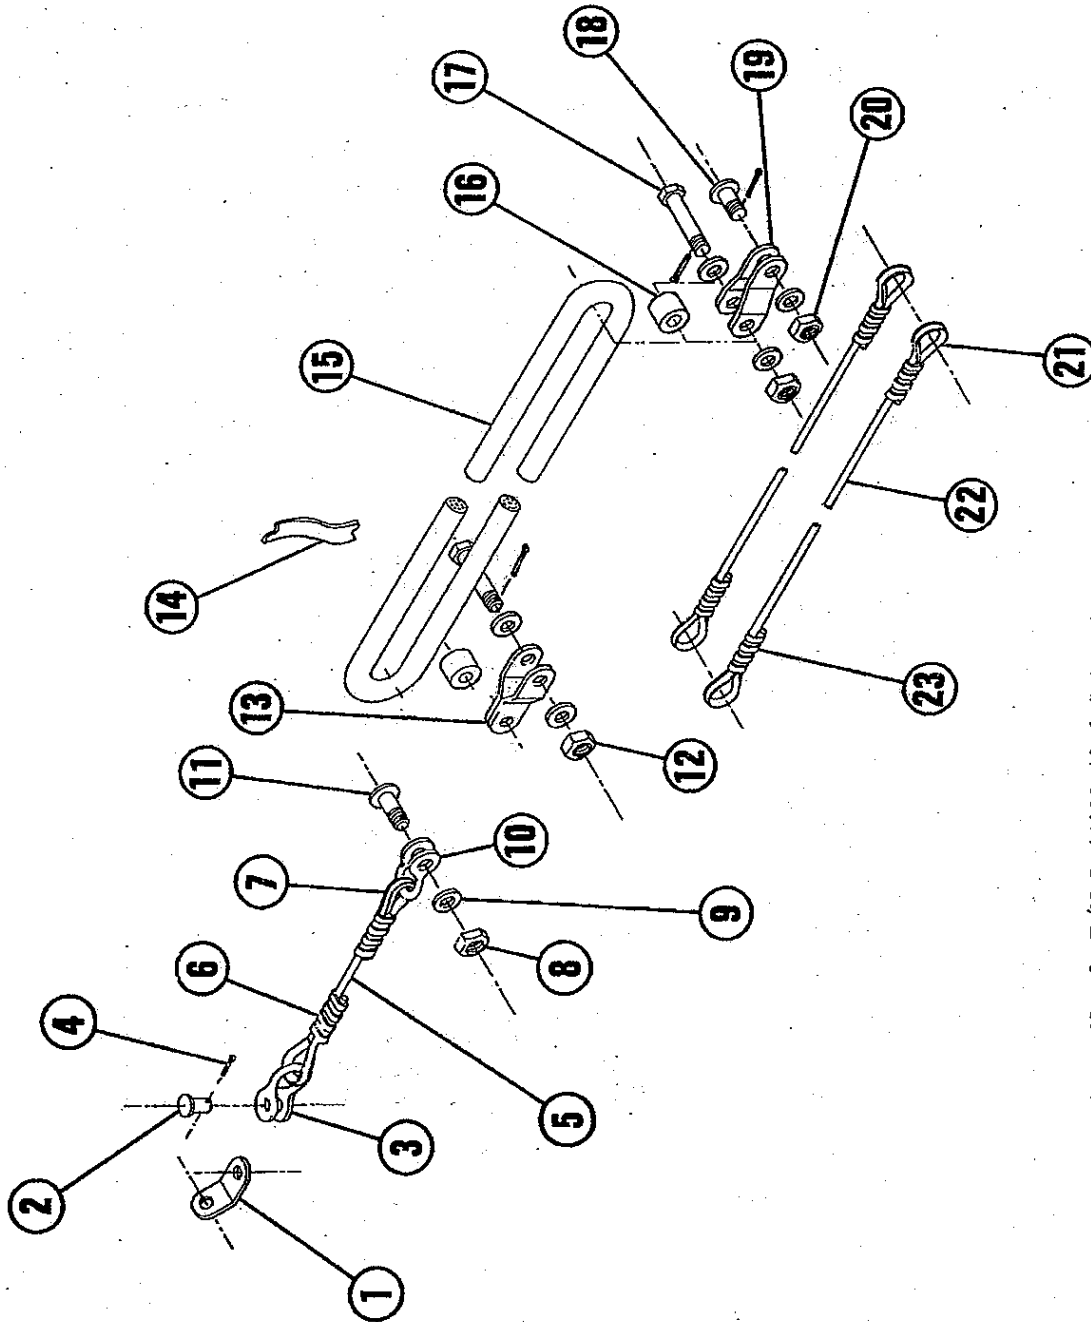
P/N L 44000-13-6 Safety Cable & Shock Ring Assy - Exploded View
